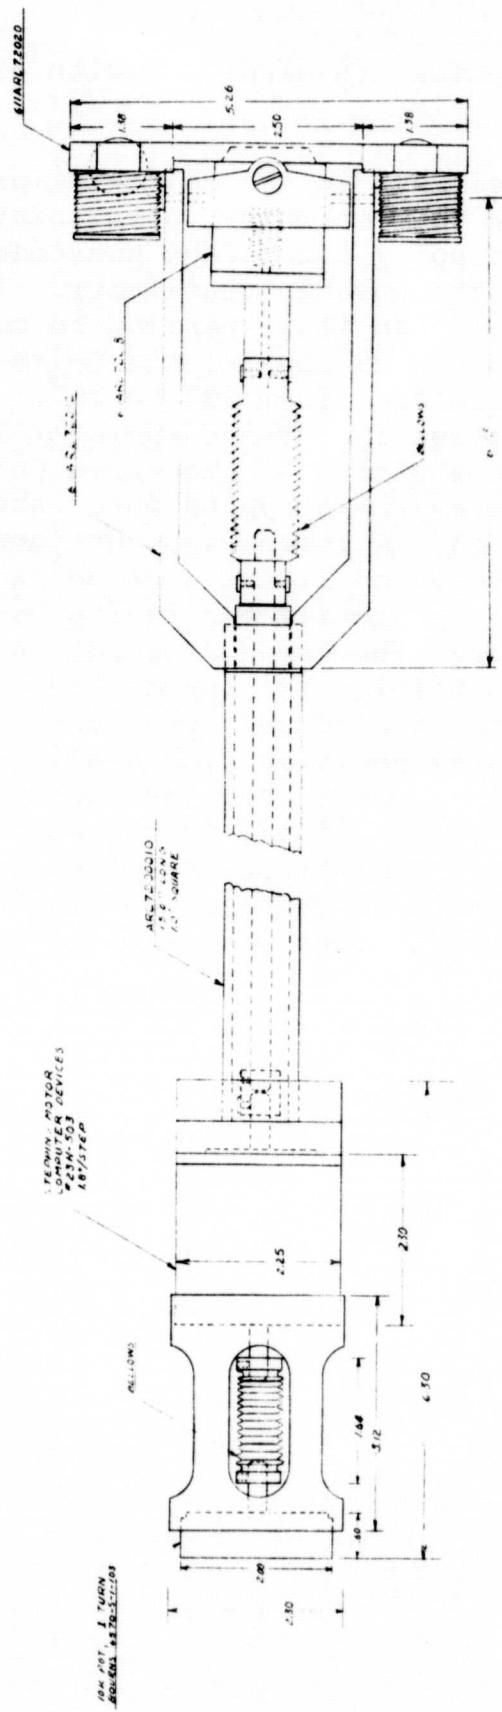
Drawing of Ultrasonic Transducer Head Assembly
